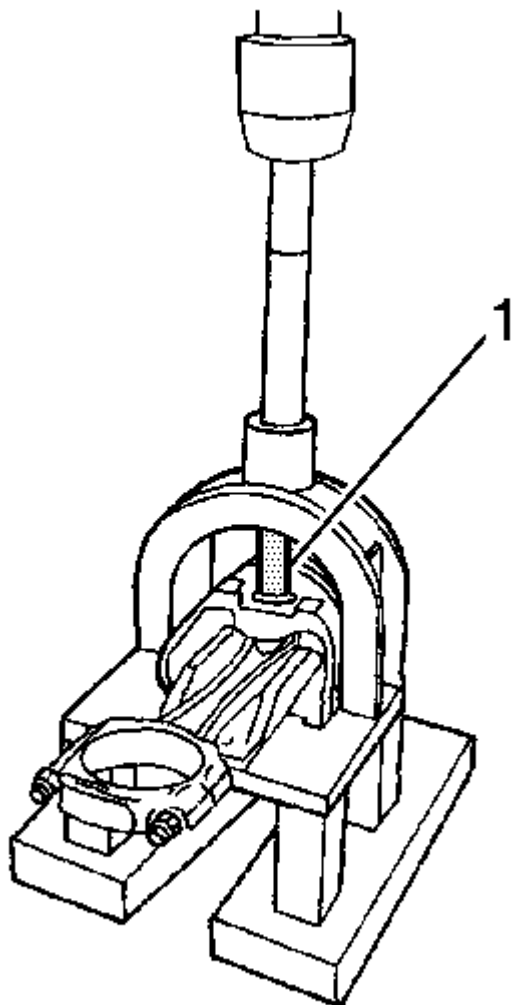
View Of Piston Pin Removal/Installation Tool J 24086-B
